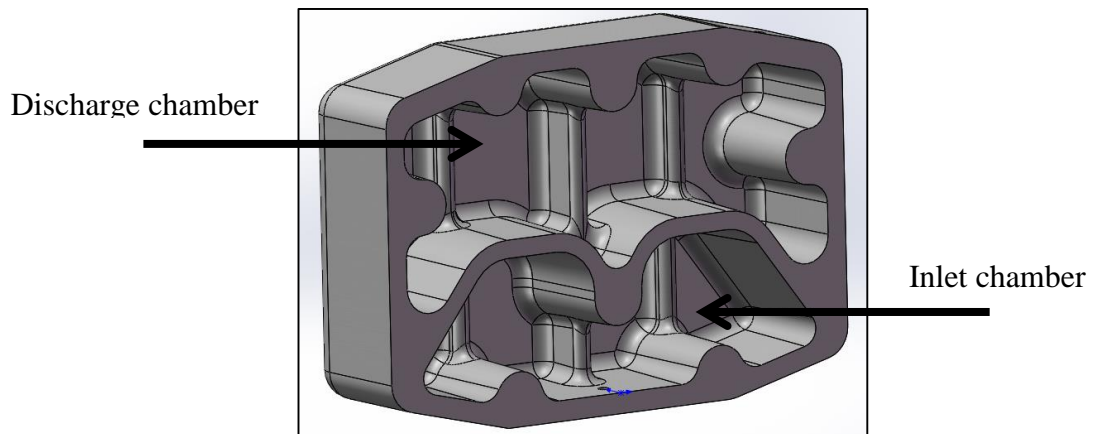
Reciprocating compressor inlet and discharge chamber
